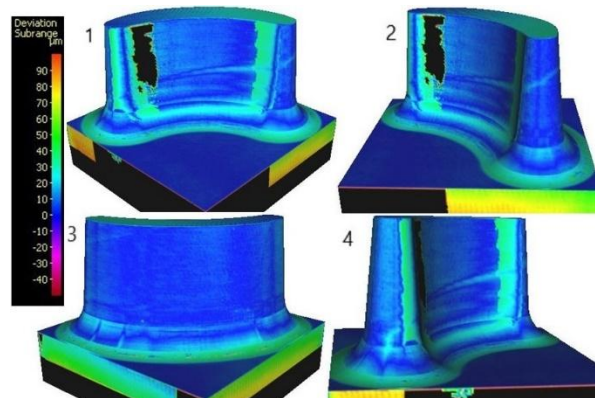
Comparison of the original model with the workpiece after milling (tool path tolerance $1\mu\text{m}$ – Check section)
